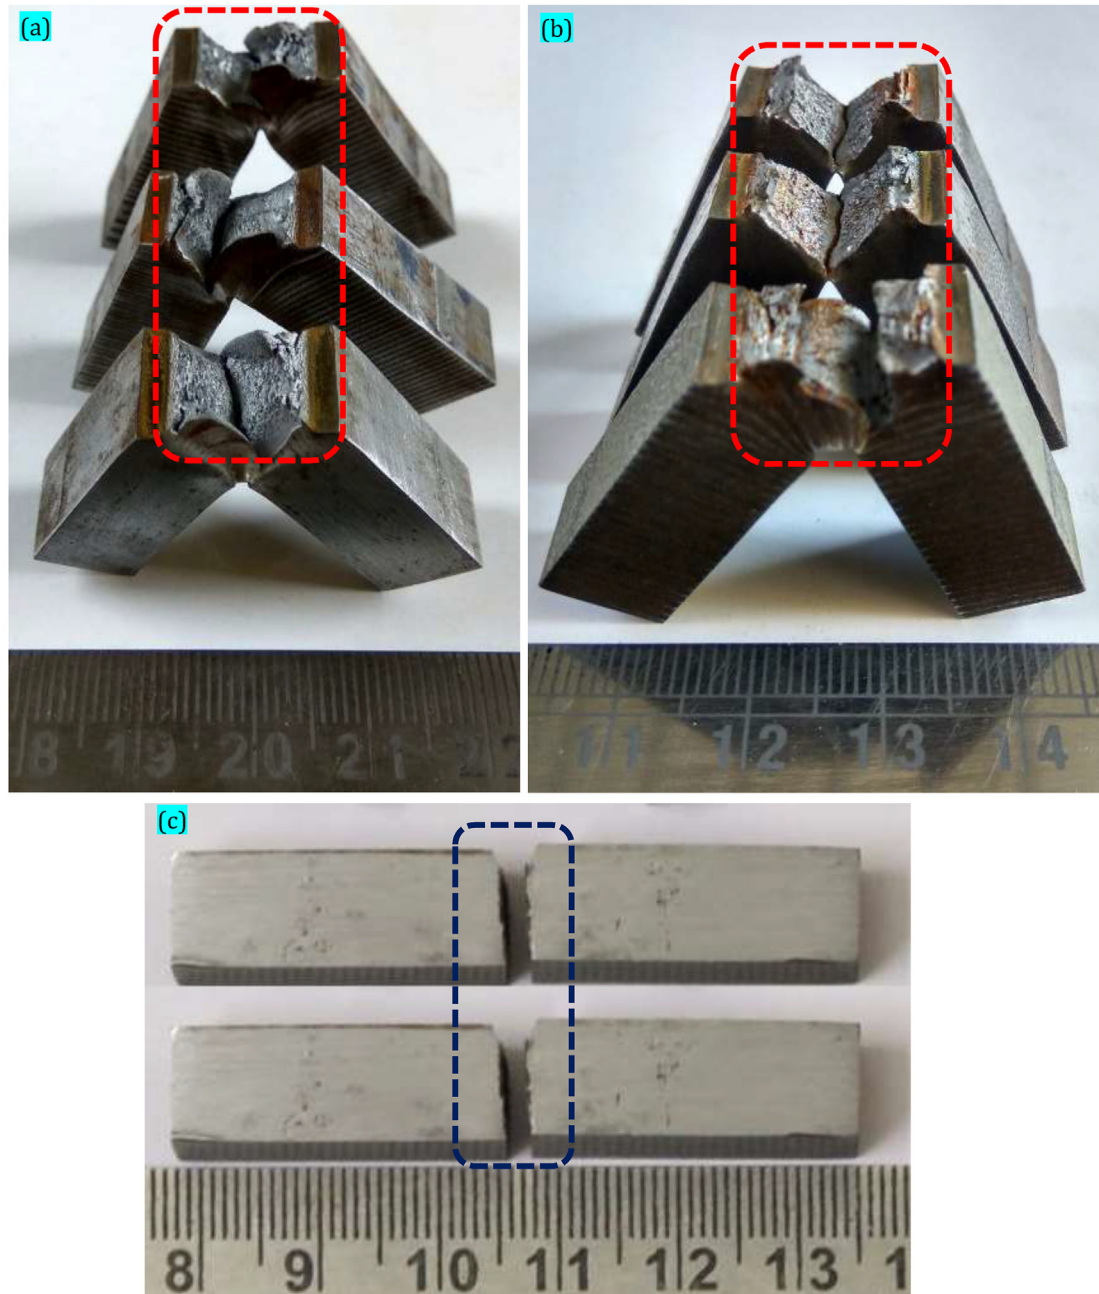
Fractured samples of PDC GTA welds of HSLA joints under (a) tensile and (b) notch tensile test.
